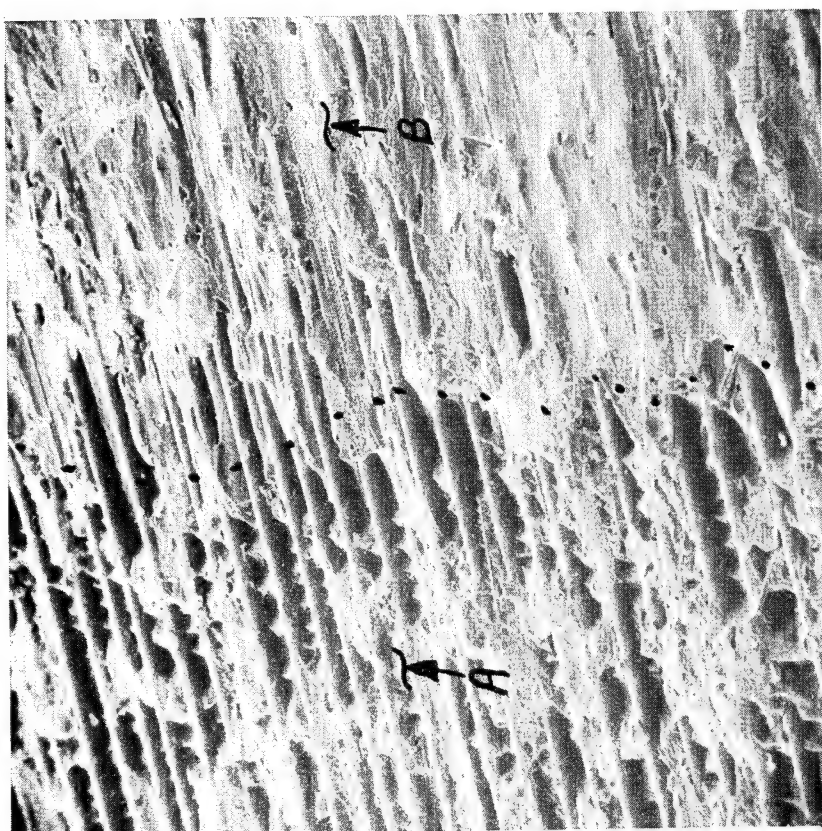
Boron Flexure Specimen Peel Apart - Shear and Peel Zones Defined
